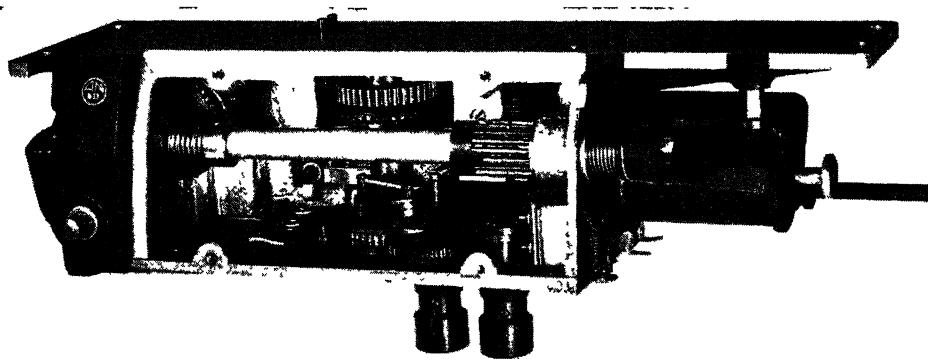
Typical camera drive mechanism showing tripping solenoid on right, shutter wind and trip couplings on bottom and magazine drive coupling on top.
